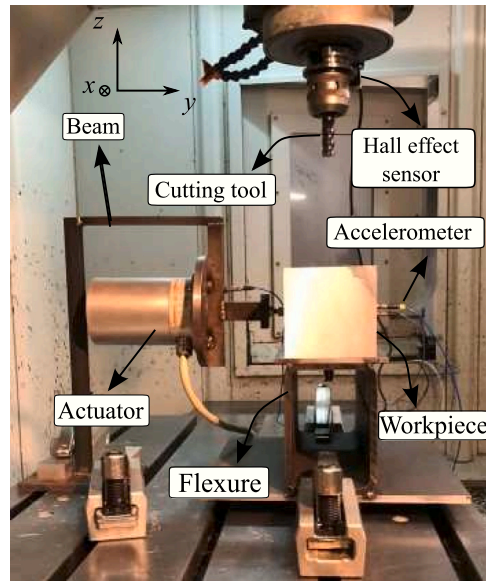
Experimental milling setup consisting of a flexible workpiece system, an actuator supported by a beam, an accelerometer on the workpiece and a hall effect sensor.
